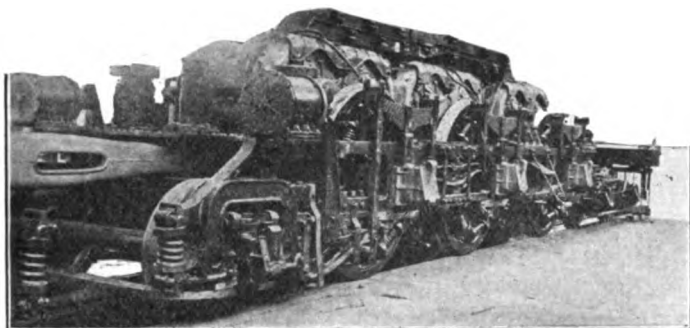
ONE-HALF LOCOMOTIVE RUNNING GEAR, SHOWING DRIVING MOTORS, COUPLING BAR AND AIR CONDUIT
